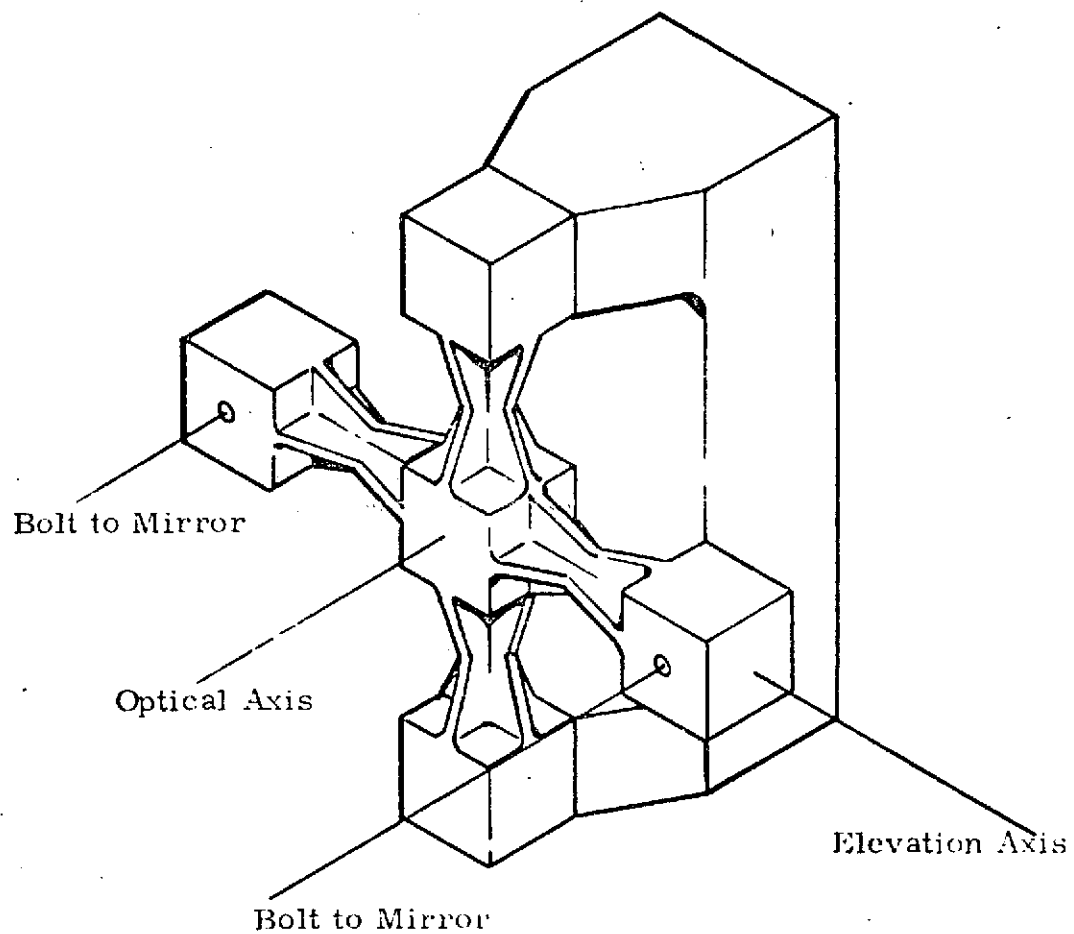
Two-Axis Cruciform Flexure (Sheet 1 of 2)
